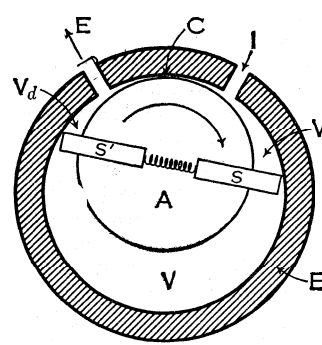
SECTION OF THE GAEDE "KAPSELPUMPE"
